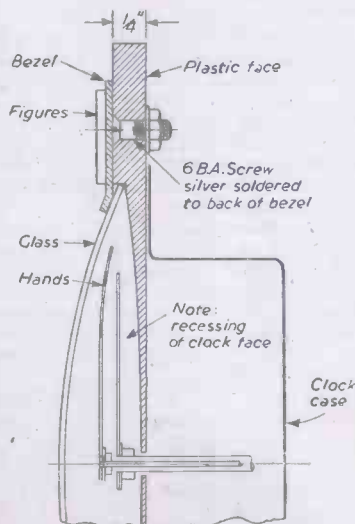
Section of clock face showing how it is recessed to take the glass and hands.
